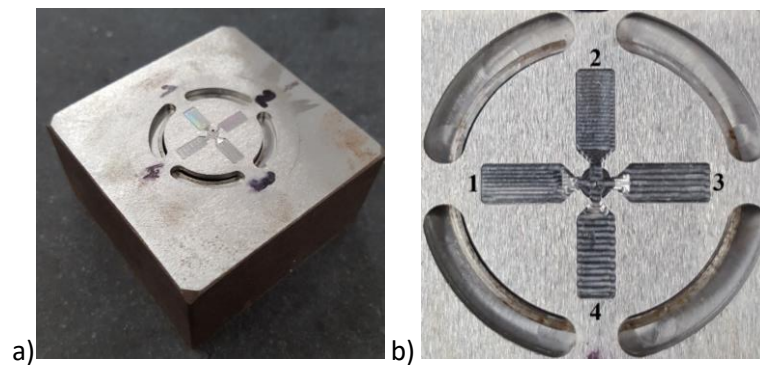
a) Disk and workpiece holder after processing and b) particular of the machined cavities
